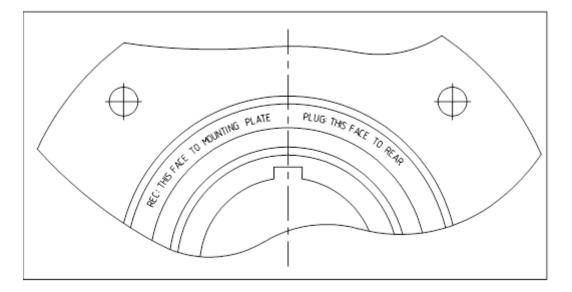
View to show ROV compliant mount flange text (note orientation of flange is different plug to receptacle)
